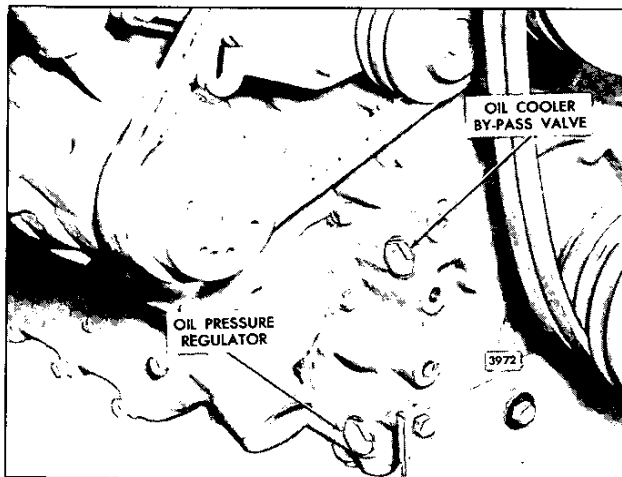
Location of Former Oil Pressure Regulator Valve (6V Engine)
